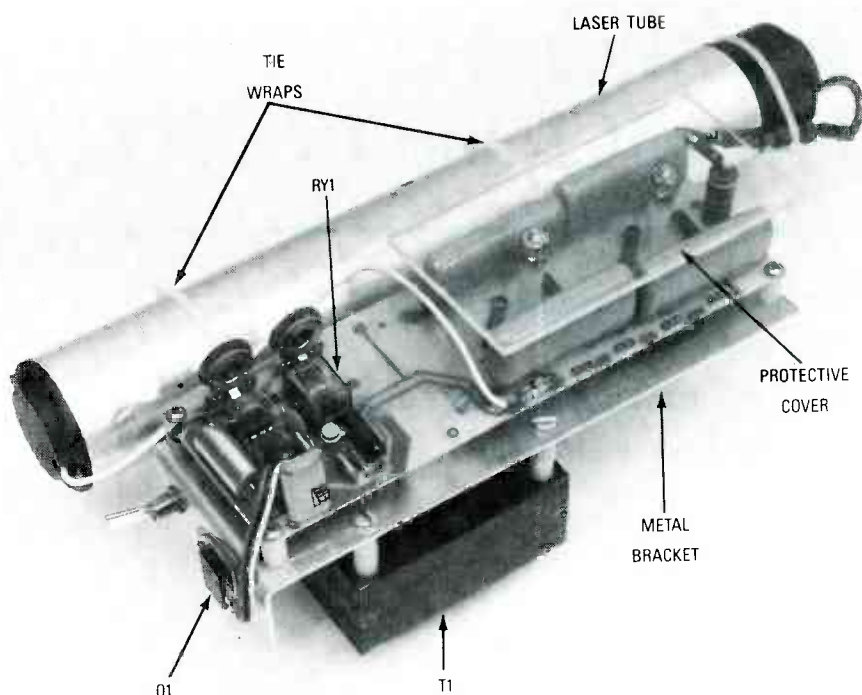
FULLY ASSEMBLED, the tube is held to the bracket with plastic straps.
